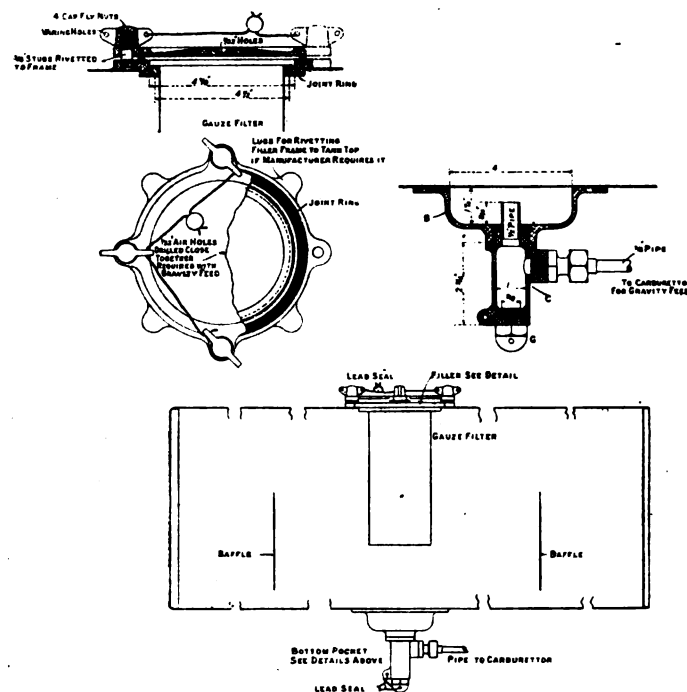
Details of Petrol Tank (Gravity Feed) for Tourist Trophy Cars.
